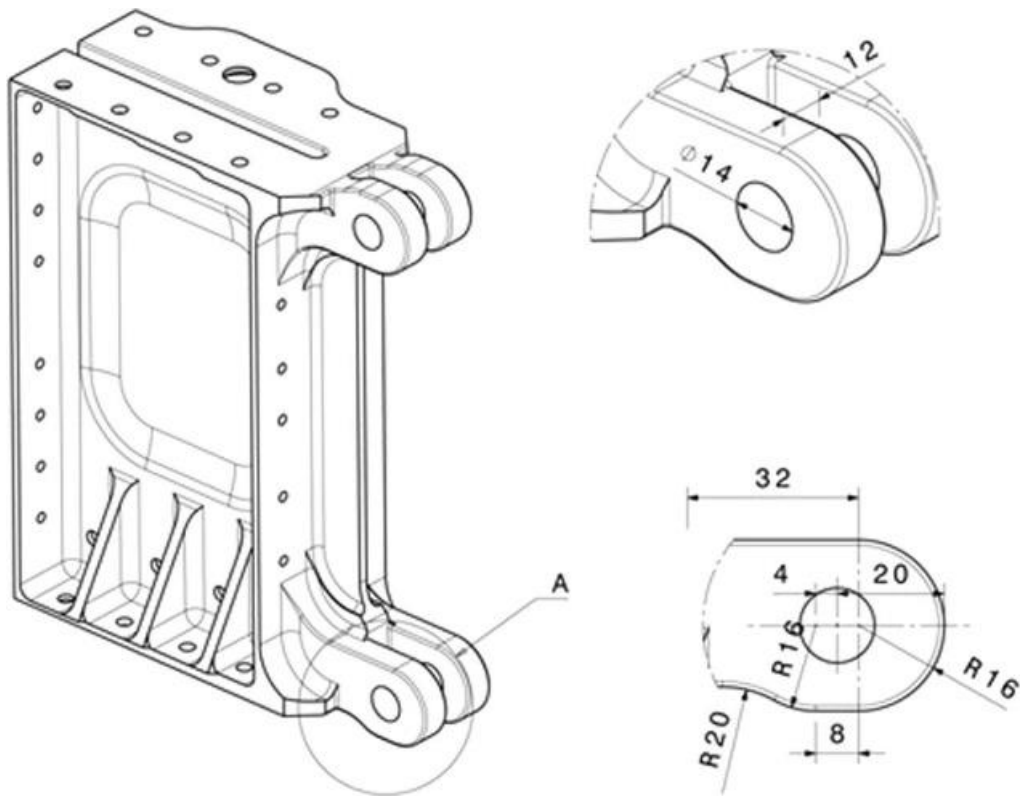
Safran O3- Wing fuselage attachment lug geometry and dimensions [213]
